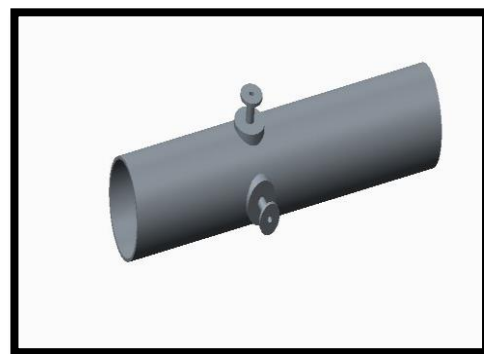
3D Model with nozzle placed at centre of cylinder without fillet
